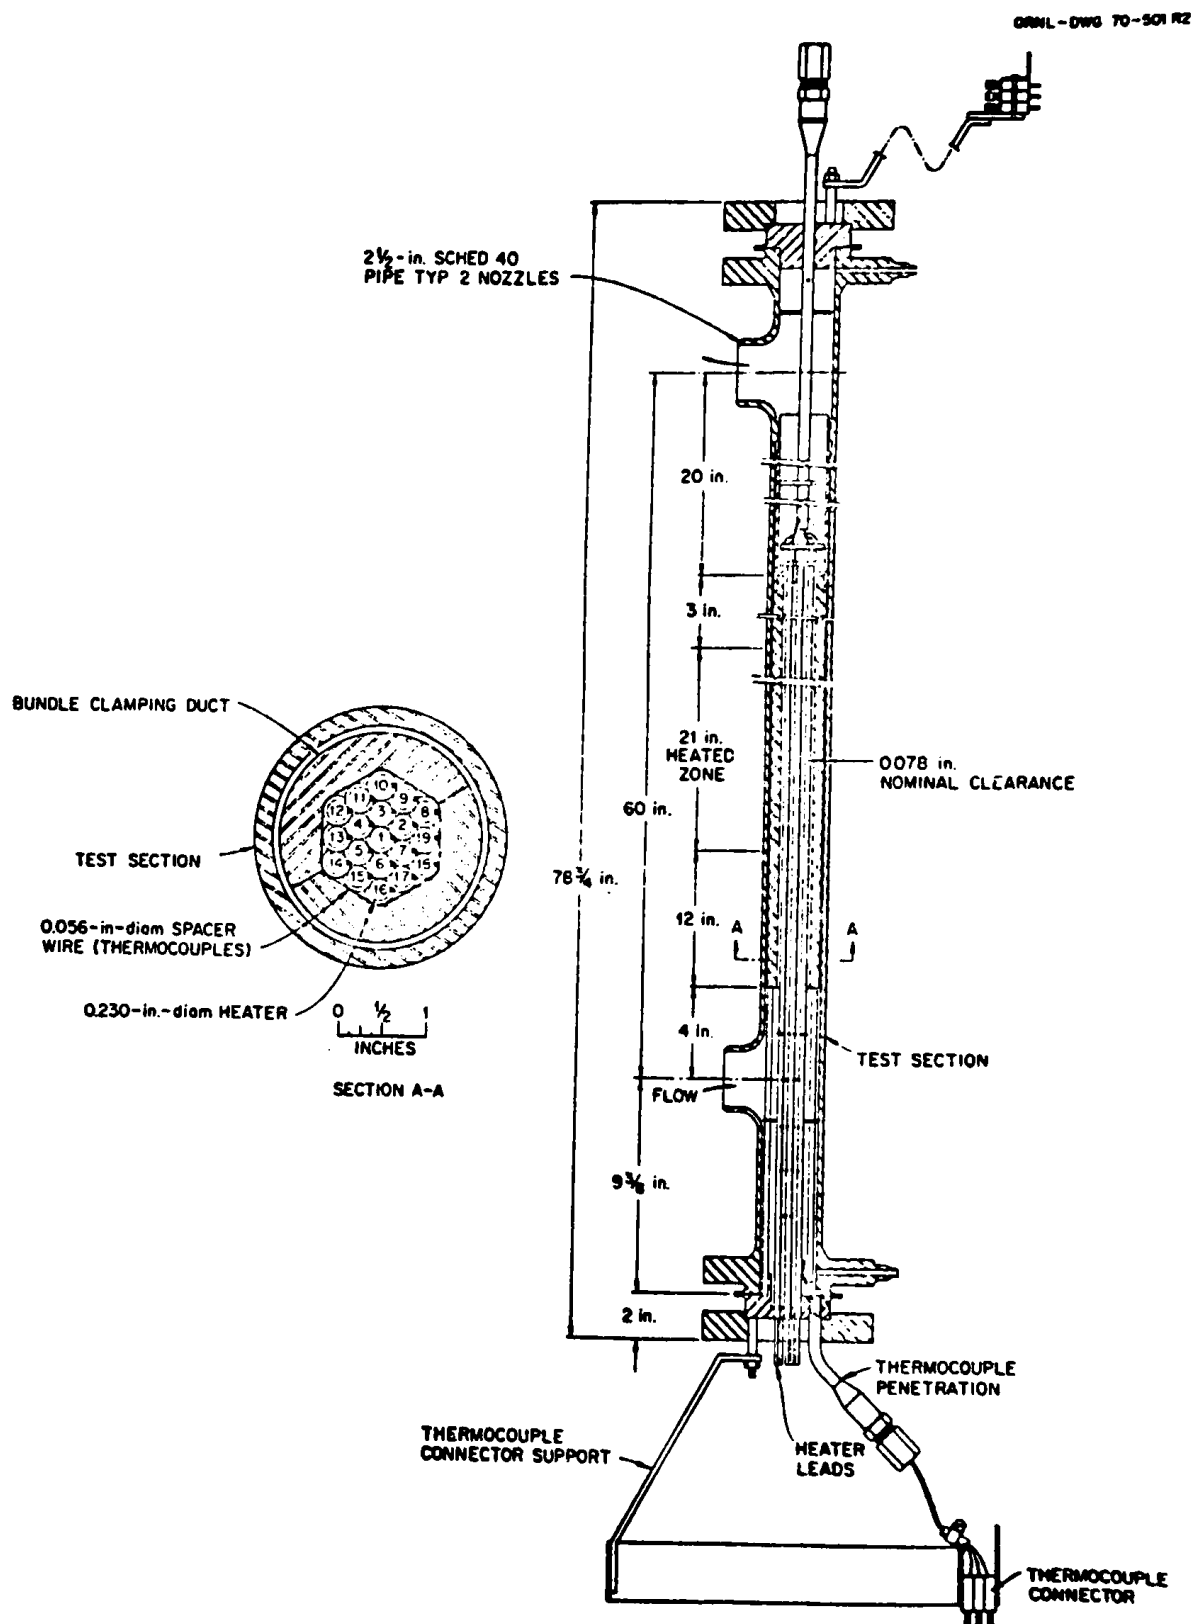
LMFBR - FFM - Test Section Assembly for Bundle 2A
